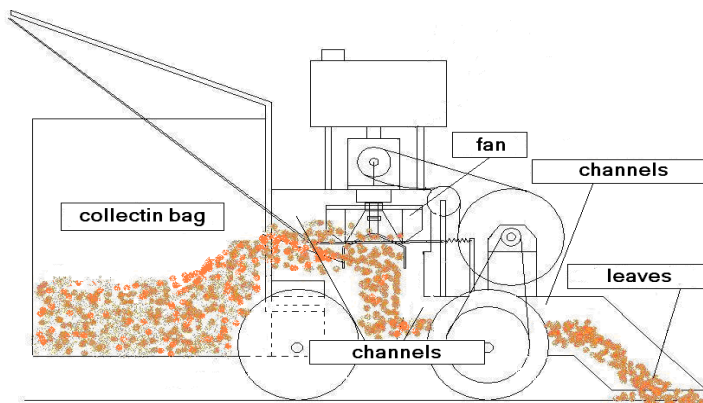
Schematic of leaf collection and vacuum mechanism of the machine
